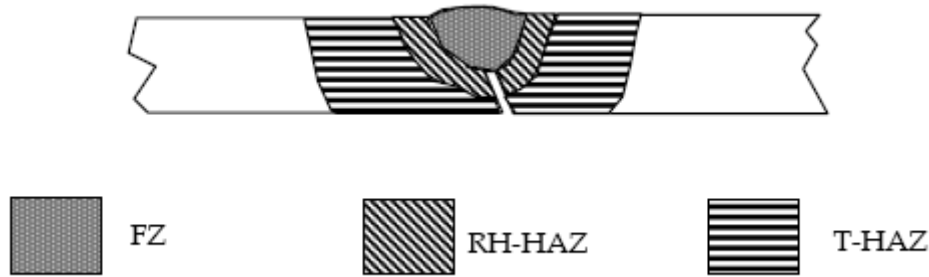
Schematic diagram of section from Y-groove test weldment showing the three different HAZs sub zones [25].
